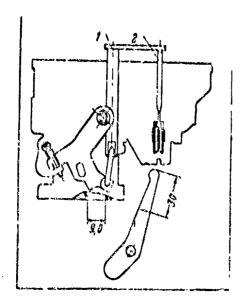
Diagram of adjusting the moment of the mechanical drive economizer valve opening: 1) bar 2) pull rod
